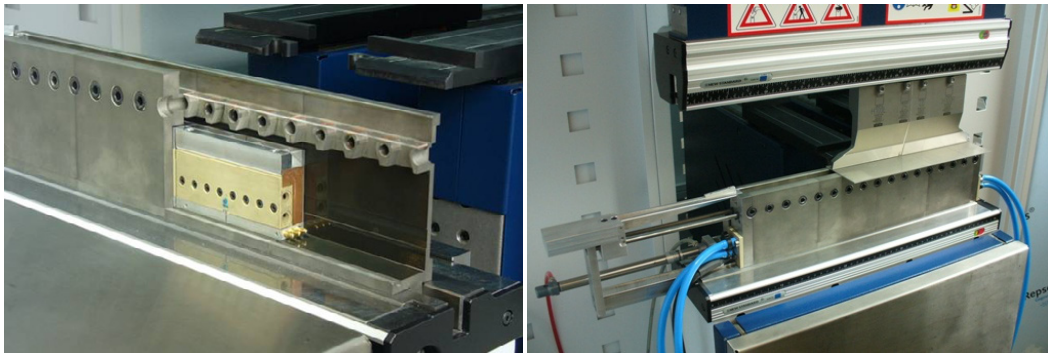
(a) Assembly of a diode laser module with a lower tool; (b) Setup for laser assisted bending with an optical power of 6.4 kW
